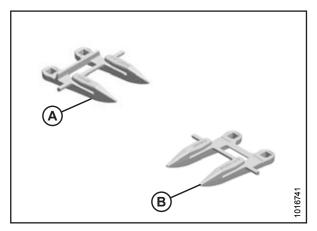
Pointed GuardsA - StandardB - Drive Side
